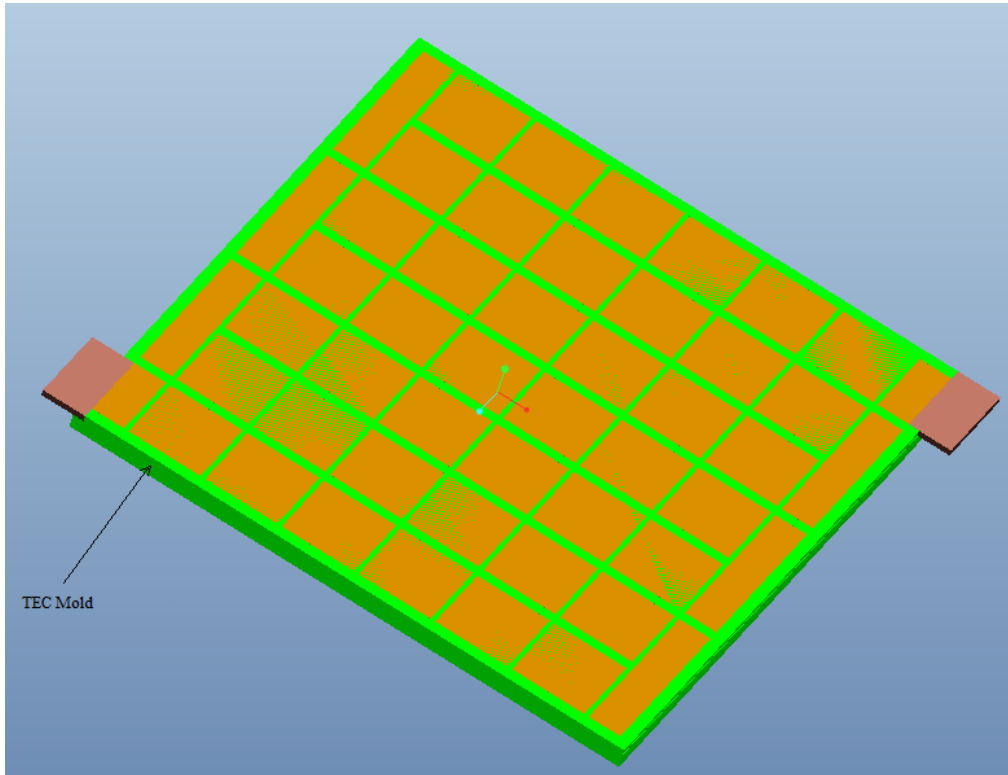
Isometric view of thin film thermoelectric cooler with TEC Mold in Pro/E
